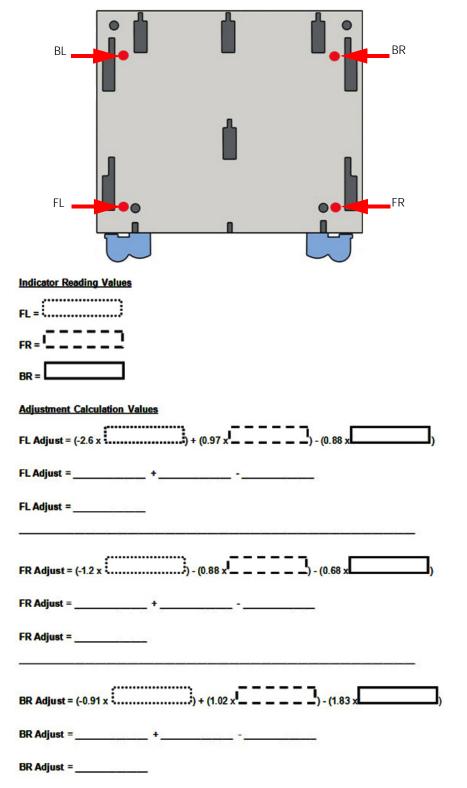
uPrint and uPrint SE measurement points and worksheet
